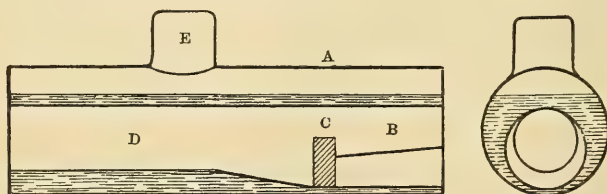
Cornish Boiler with Single Furnace. Longitudinal and Transverse Sections.
